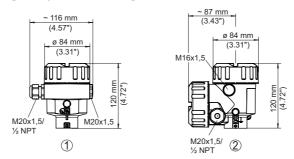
Housing versions with protection rating IP66/IP68 (0.2 bar), (with integrated display and adjustment module the housing is 18 mm/0.71 in higher)
